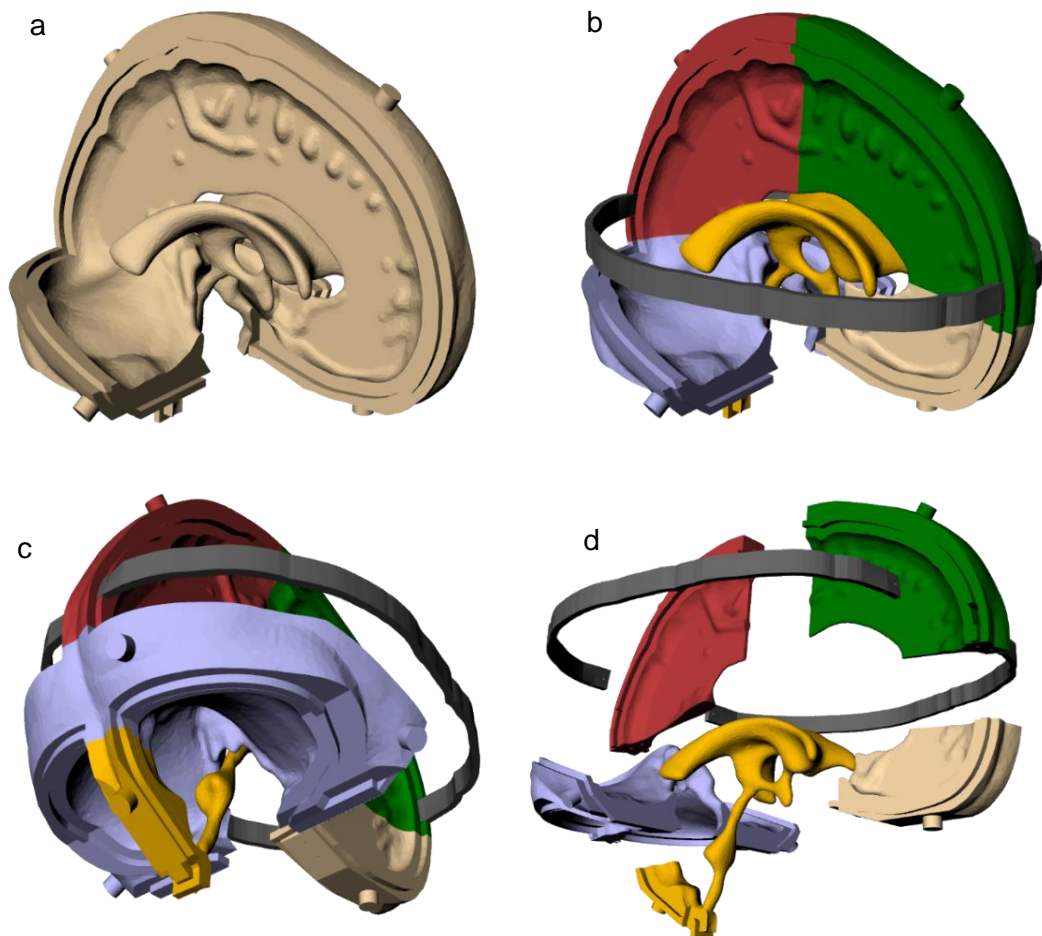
Producing the mould insert geometries from the master insert geometry. a) master insert geometry reproduced with fewer studs; b) master insert geometry split into 5 pieces with locating bands added; c) alternative view of (b); d) mould insert geometries and locating band.
